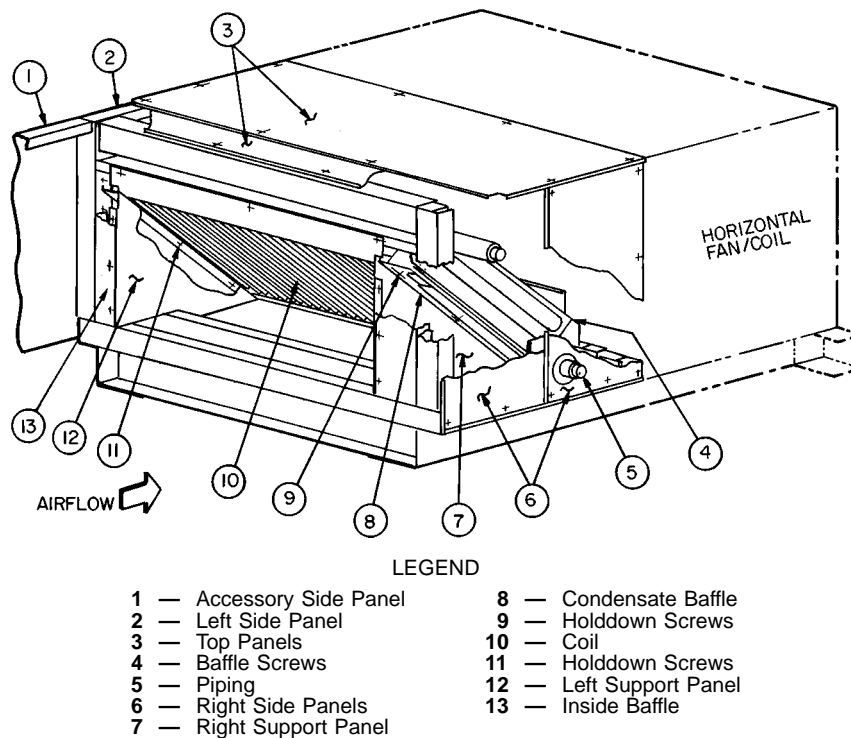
Horizontal Unit Slant Coil Removal (39LA Units — Sizes 03-21)
